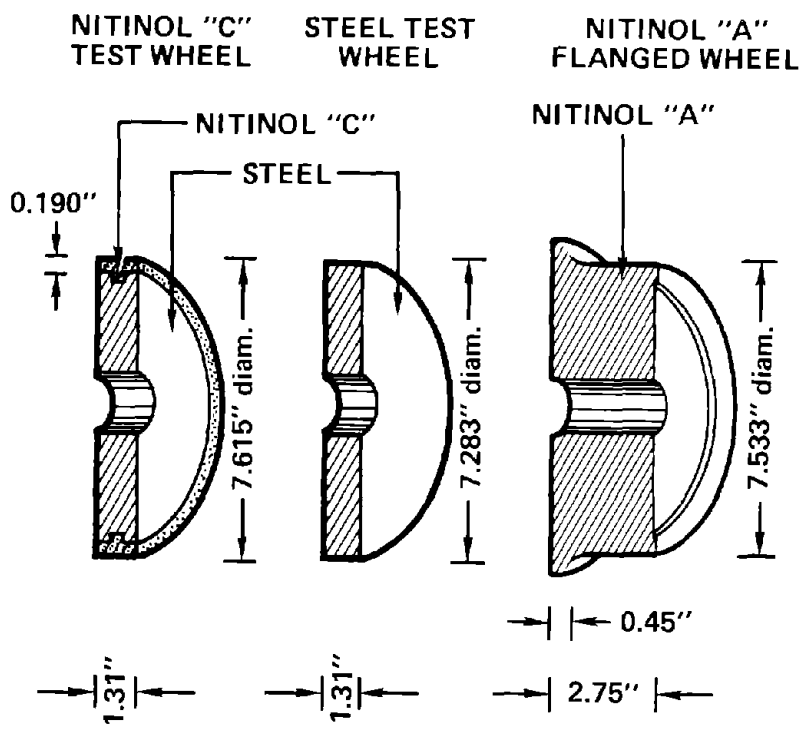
DIMENSIONS OF THE THREE TEST WHEELS.
